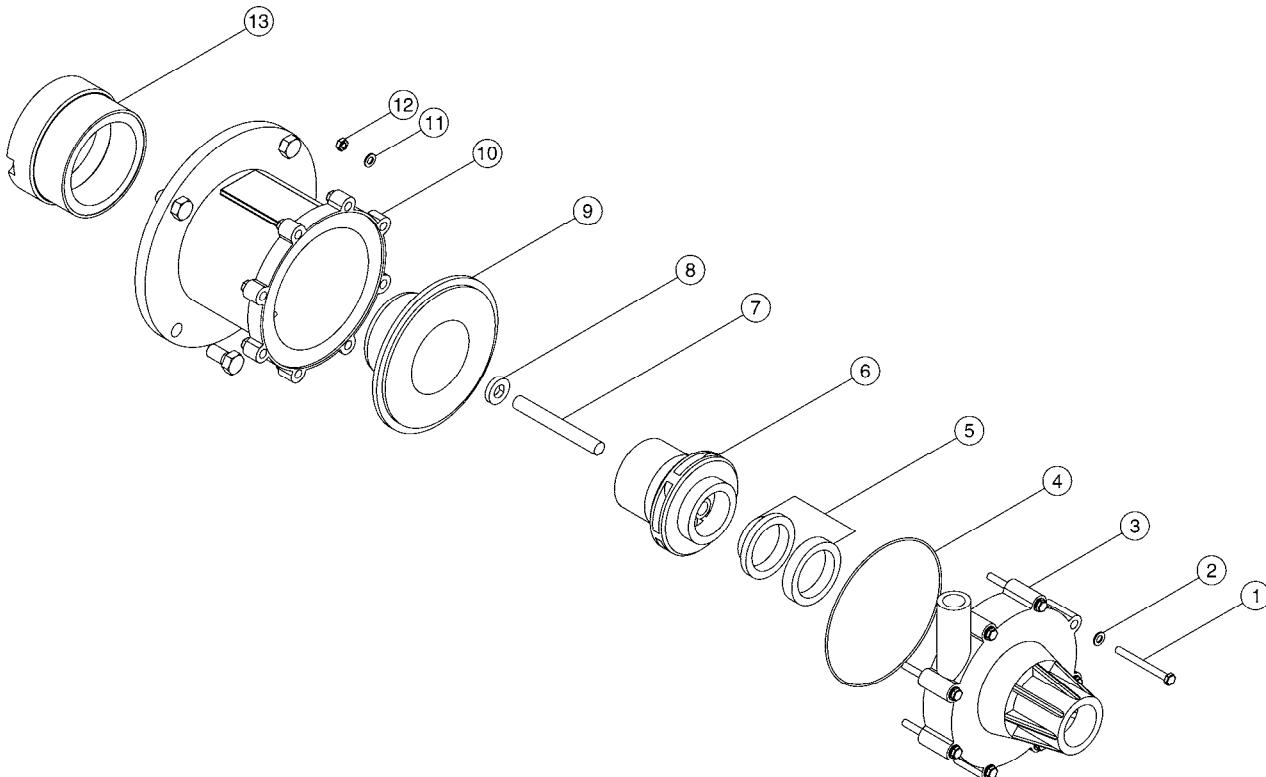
Exploded view of the Magnetic-Drive Centrifugal Pump.
